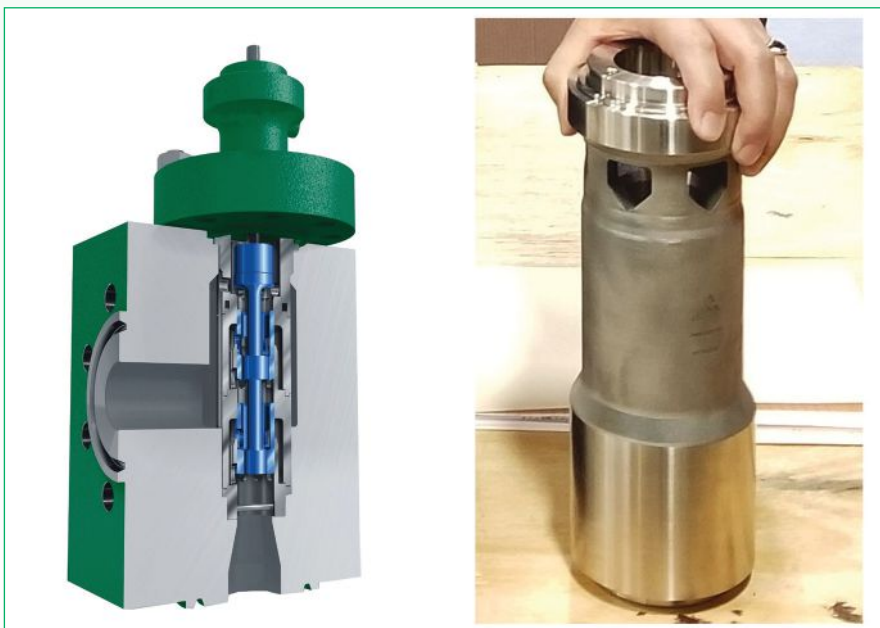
DST Valve design and R31233 cobalt chrome internal components enabled by additive technology (3D metal printing).
